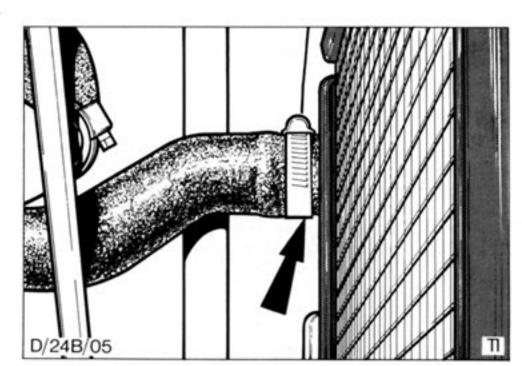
Radiator bottom hose clamp (fan shroud removed for clarity).
